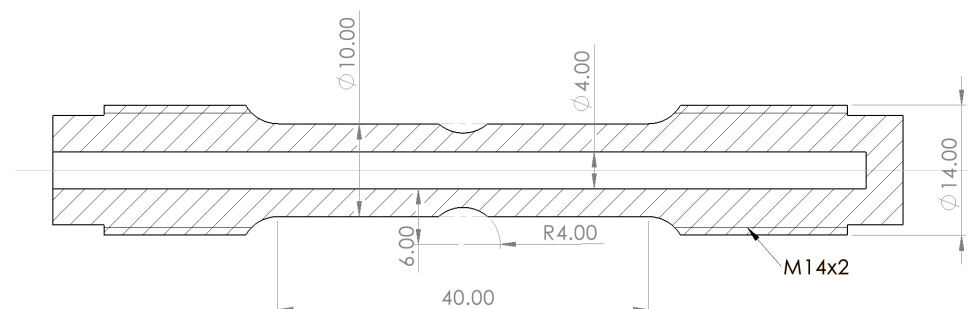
Technical drawing of the sample geometry. Dimensions are given in mm.
